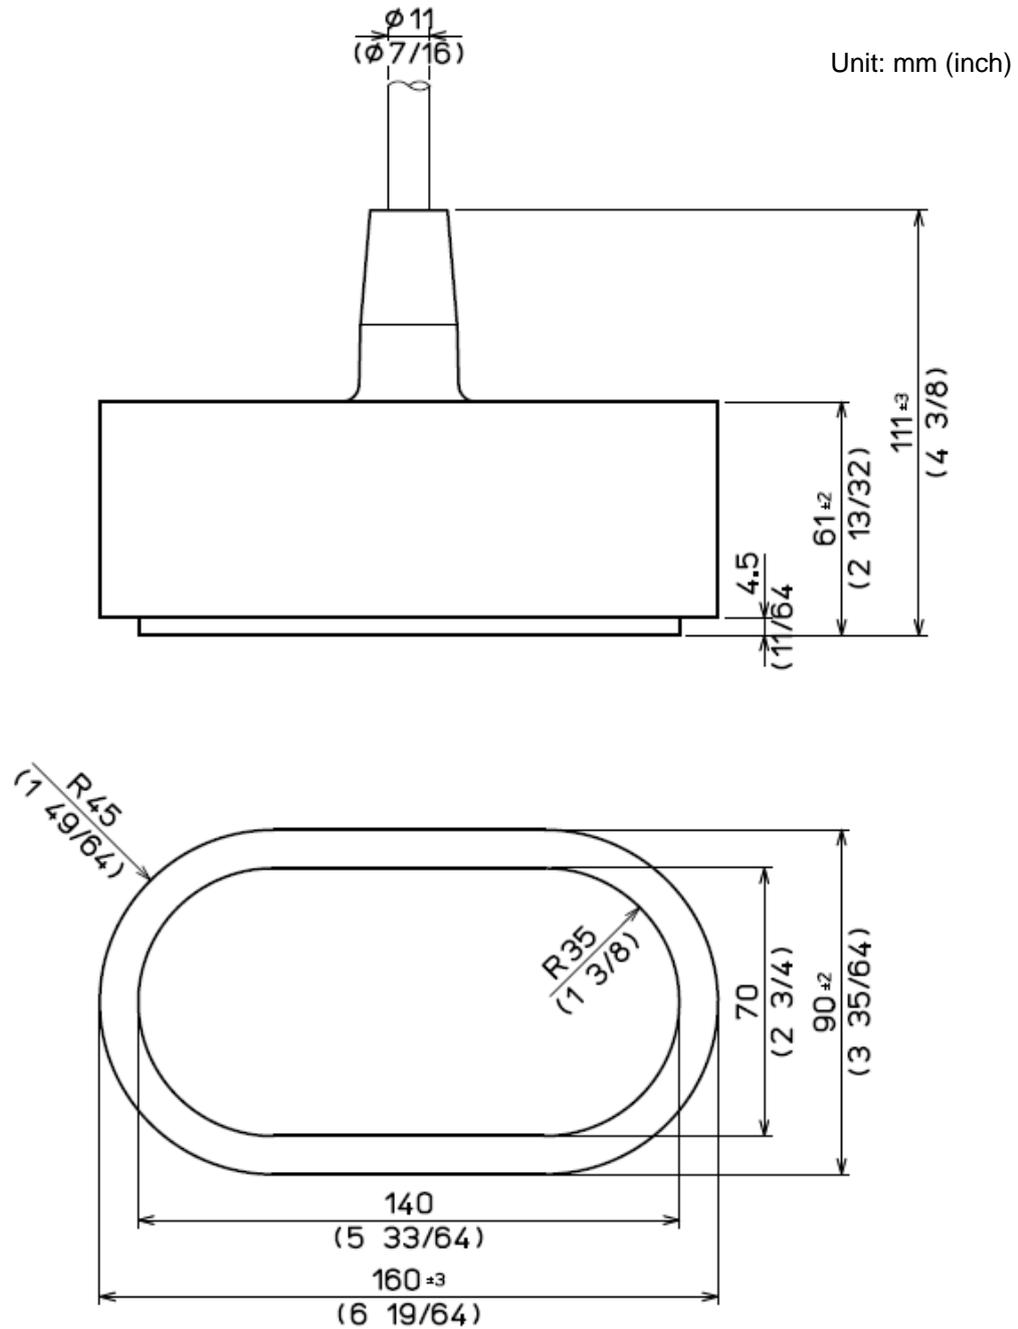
Outline dimensions of a transducer (TD-501C, TD-501B/TD-751/TD-2001D)
